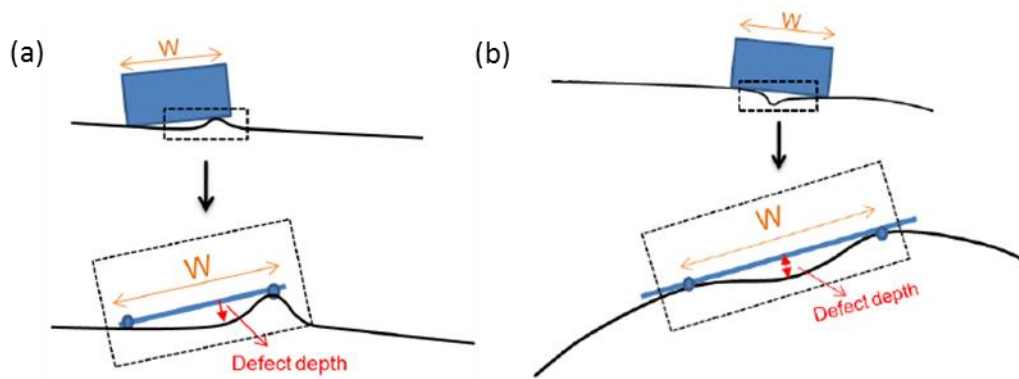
PAM-STAMP's stoning analysis to measure defects caused by bumps (a) and hollows (b) on a flat or convex blank
